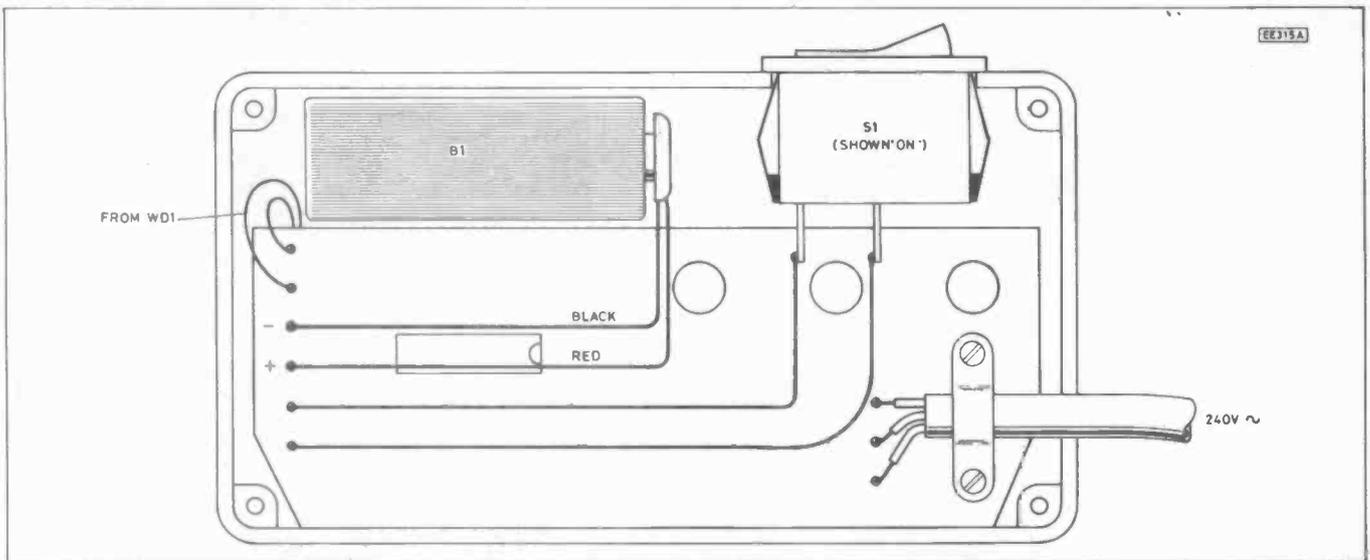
Layout of components inside the case and interwiring details. Note the "wings" on S1 for holding the switch firmly in position.
